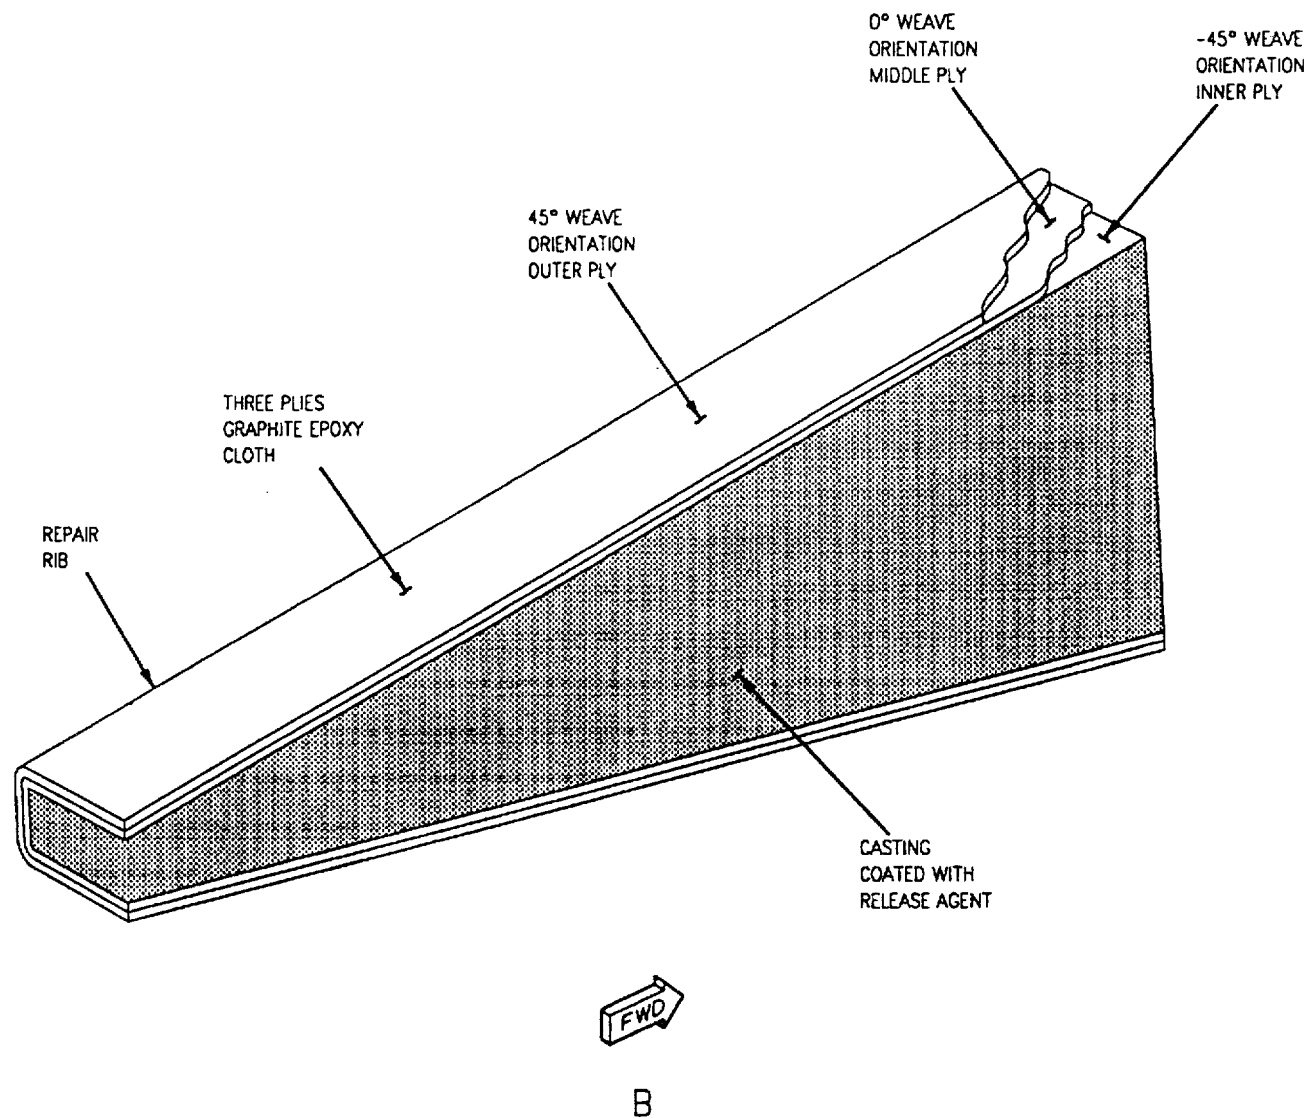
Inboard Aft Closure Rib and Skin Damage Repair (Sheet 3)
